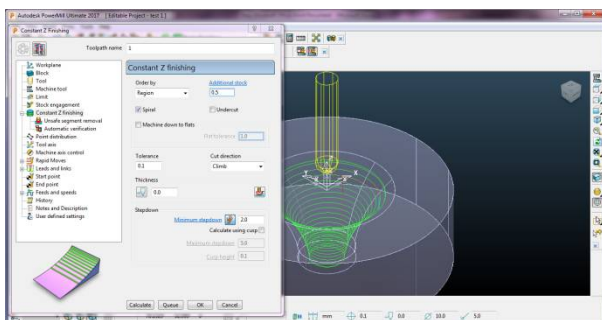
Tool path and the settings applied by "Power Mill" software
